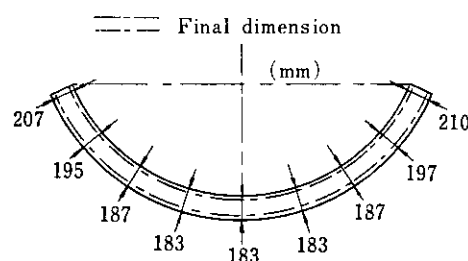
Dimension of bottom head dome formed and quench-tempered
